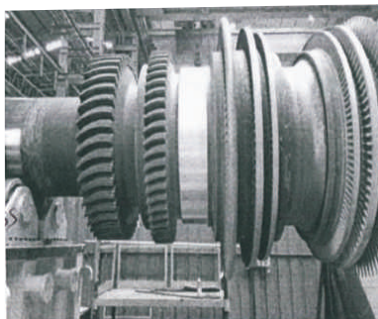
Stage of rotor machined and ready for weld built up
